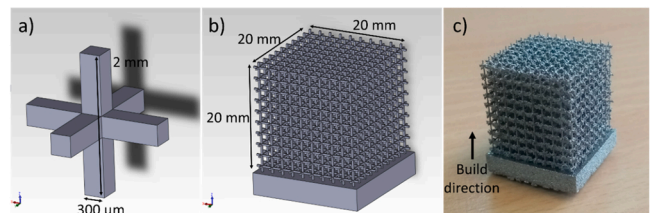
Illustration of (a) CAD design of the lattice cell, (b) CAD design of the full lattice structure, (c) manufactured lattice structure.
